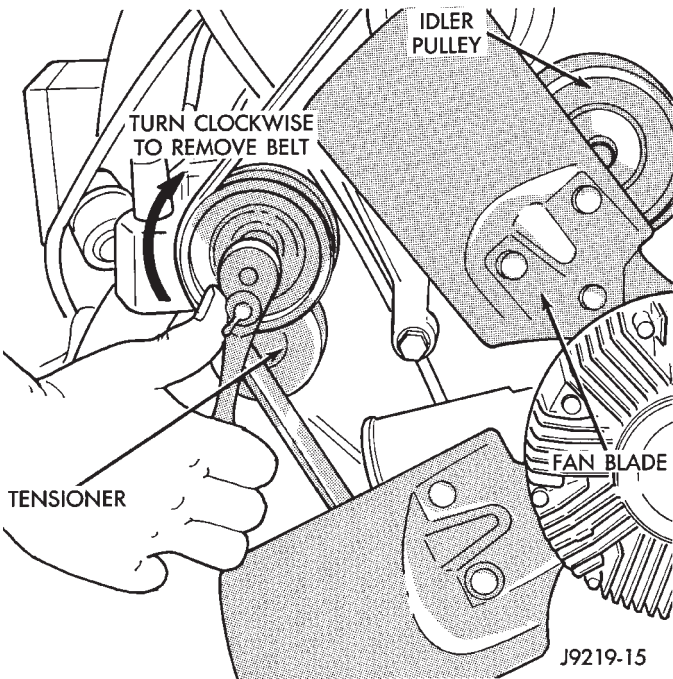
Automatic Belt Tensioner—Belt Removal/Installation
